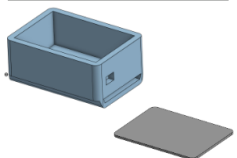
Solidworks assembly of 3D printed ankle band box with a lid
